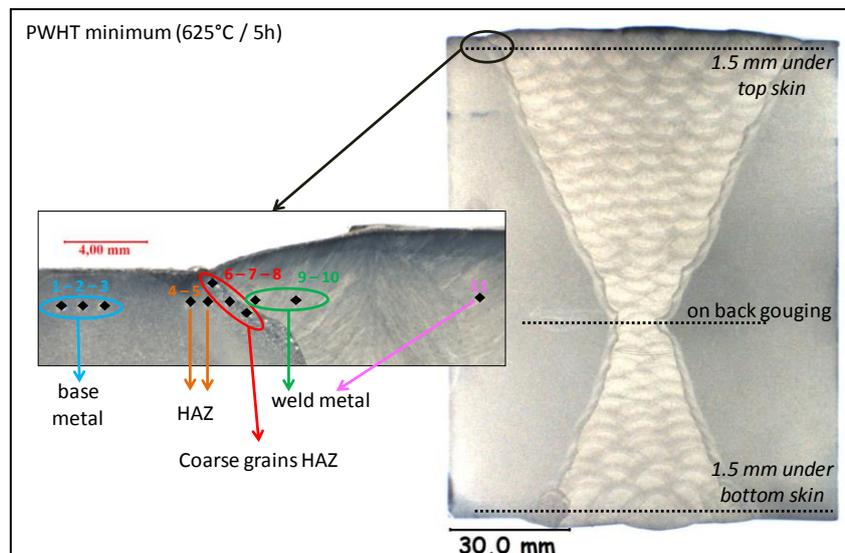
120 mm thick Submerged Arc Welding (SAW) cross section macrograph
